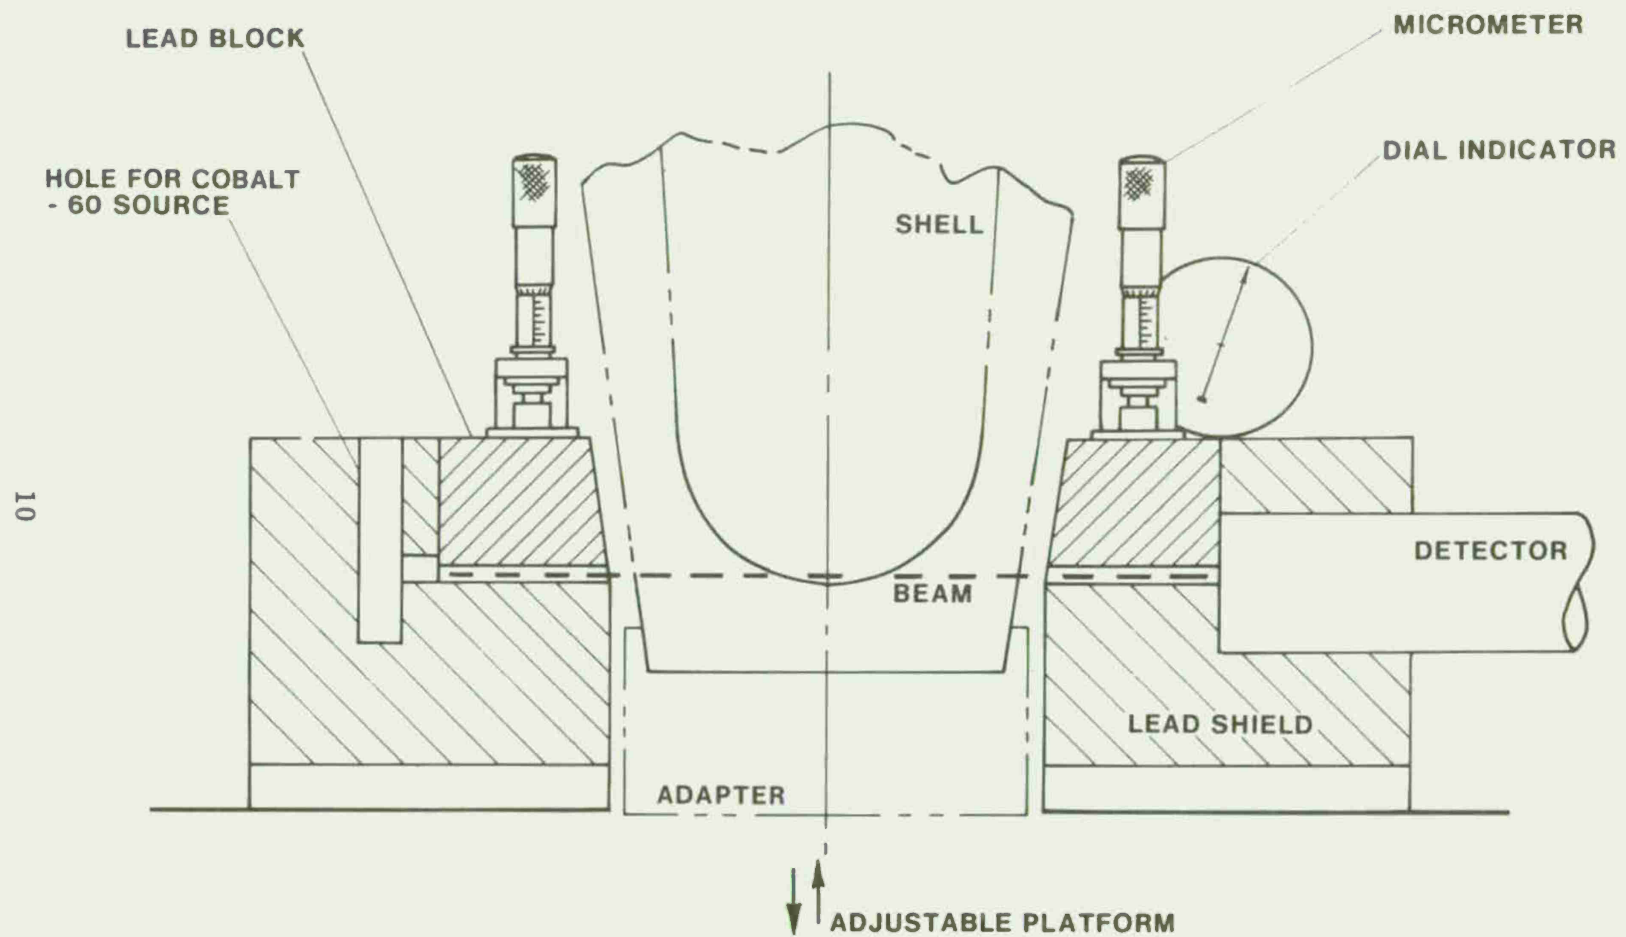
Collimator prototype - gamma-ray assembly with 175 mm shell base
